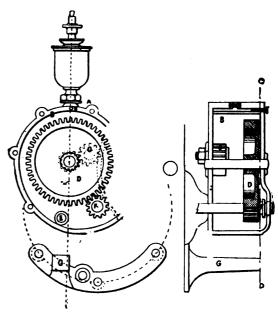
DETAILS OF MECHANISM OF COUGET GEAR.
